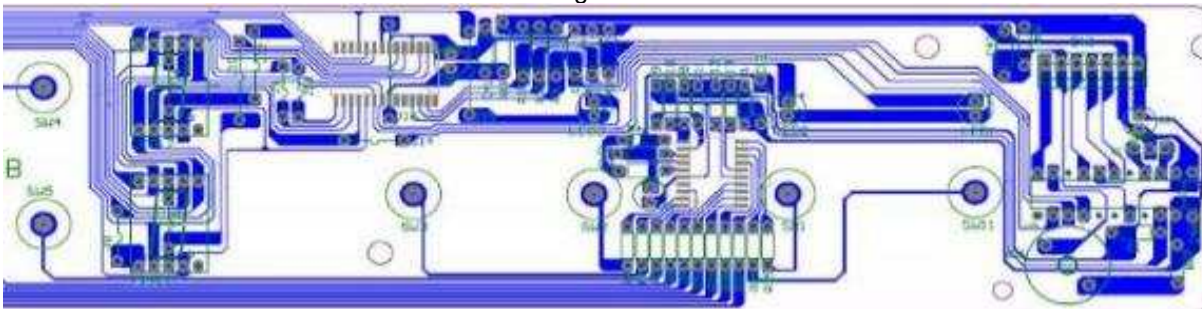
18 - Optional PCB layout of Control for model C74E-BBCC02
